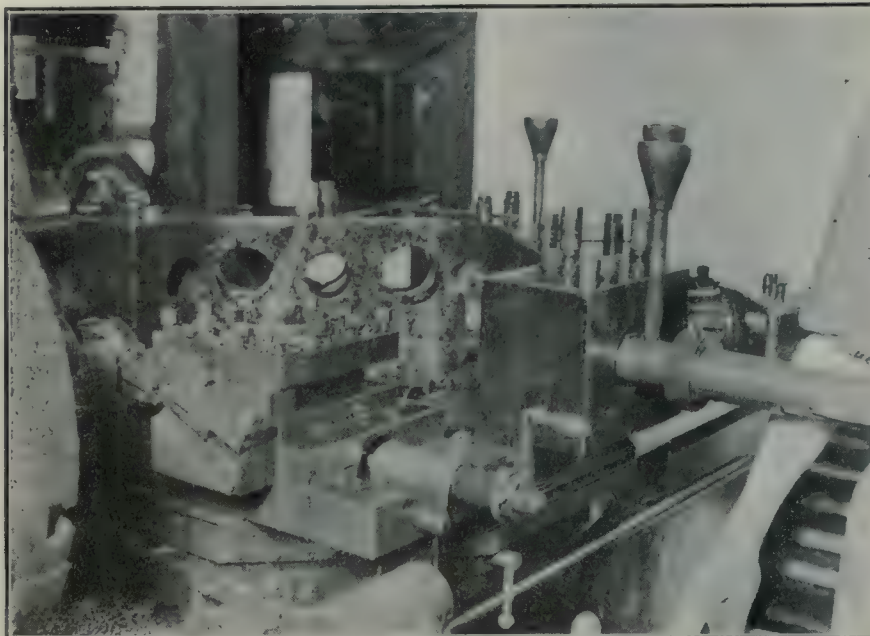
AMERICAN TURRET LATHE FITTED UP FOR BORING 18-POUNDER SHRAPNEL SHELLS.
